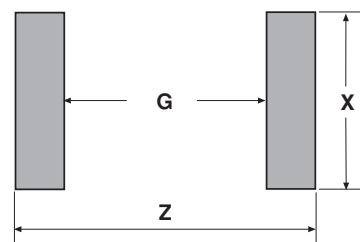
DIMENSIONS AND LAND PATTERN in inches (millimeters)
